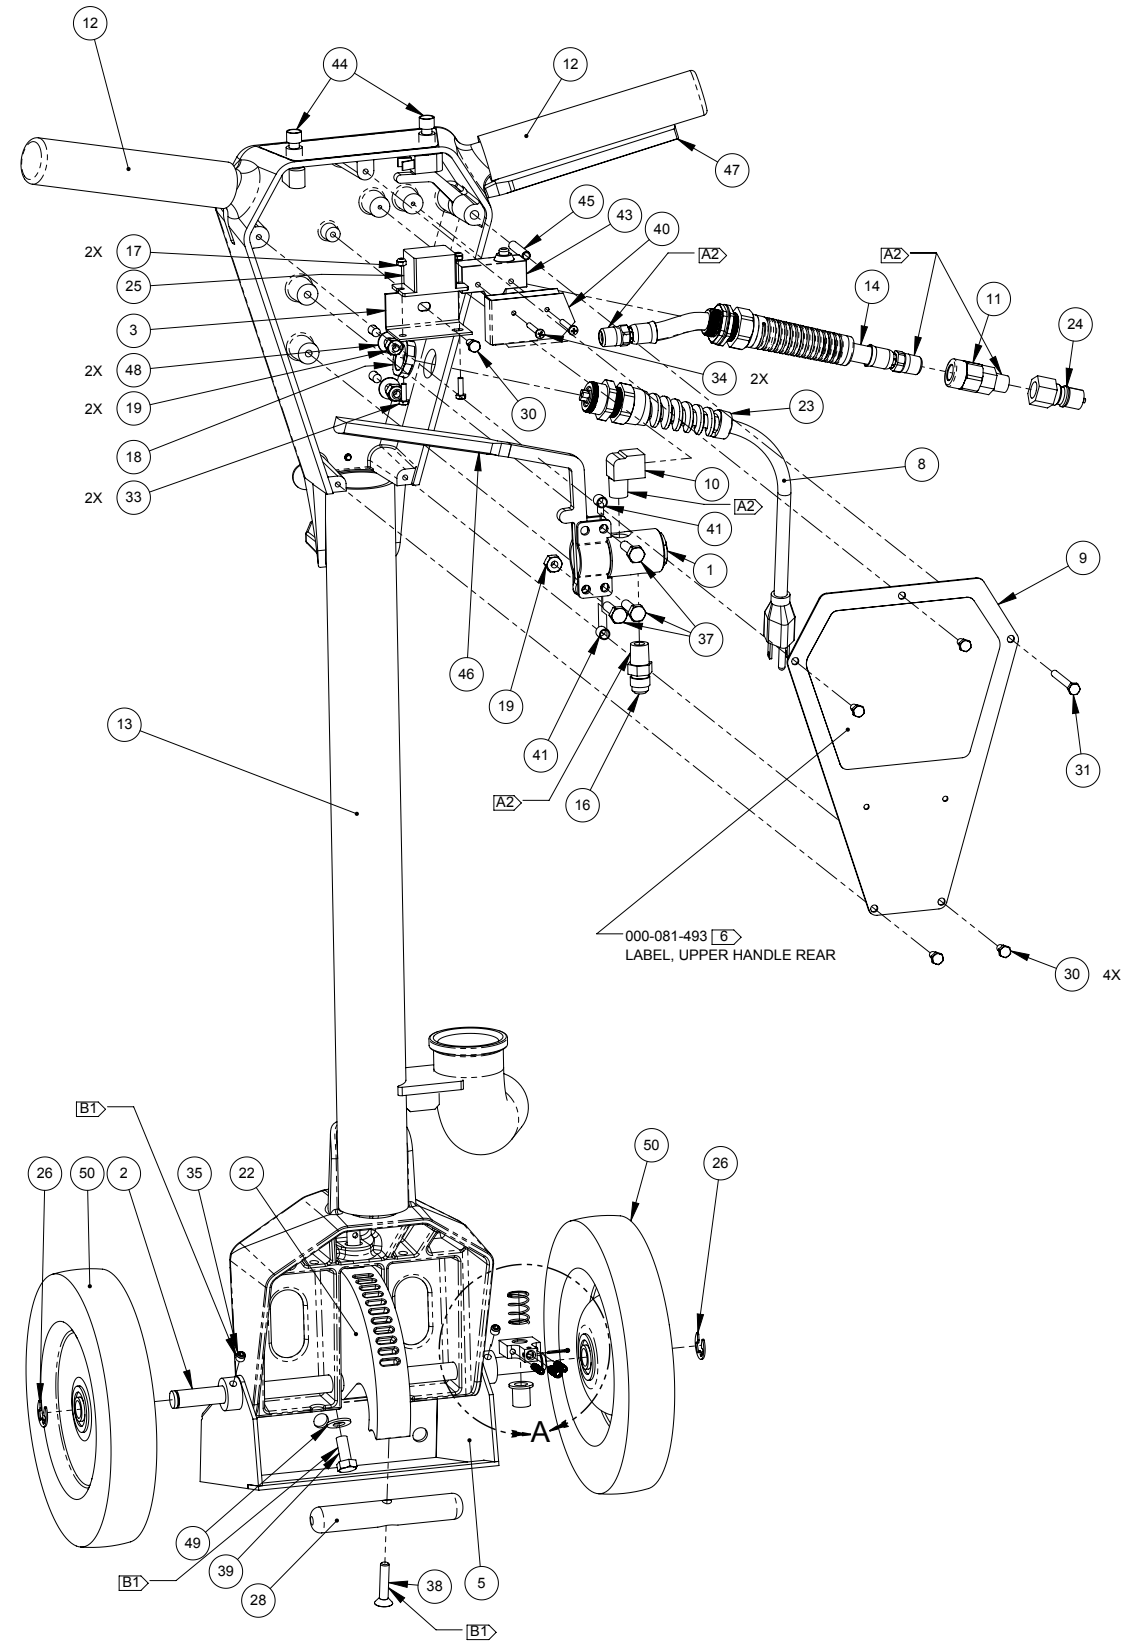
Upper and Lower Handle Assembly - View 3 of 3
